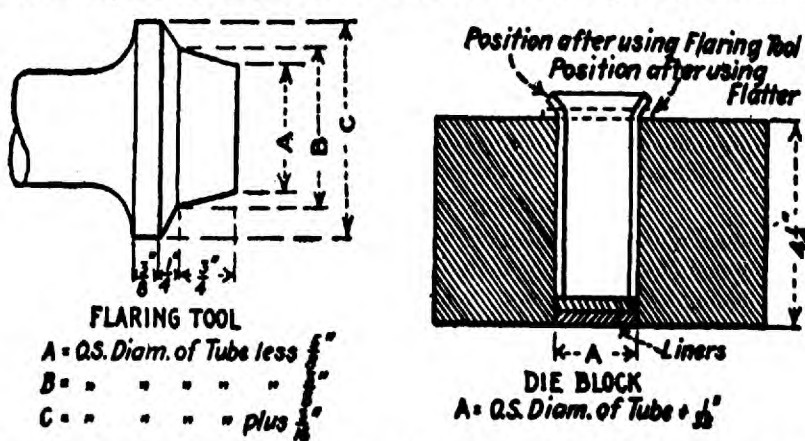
Details of Flaring Tool and Die Block Required for Making Flange Tests of Boiler Tubes.
